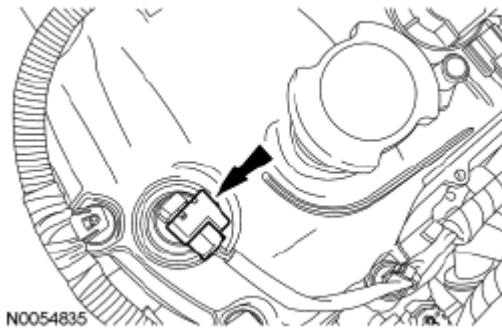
Locating LH VCT Solenoid Electrical Connector
